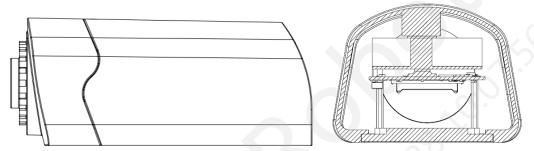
X3 thermal solution assembly example in IPC-side view
